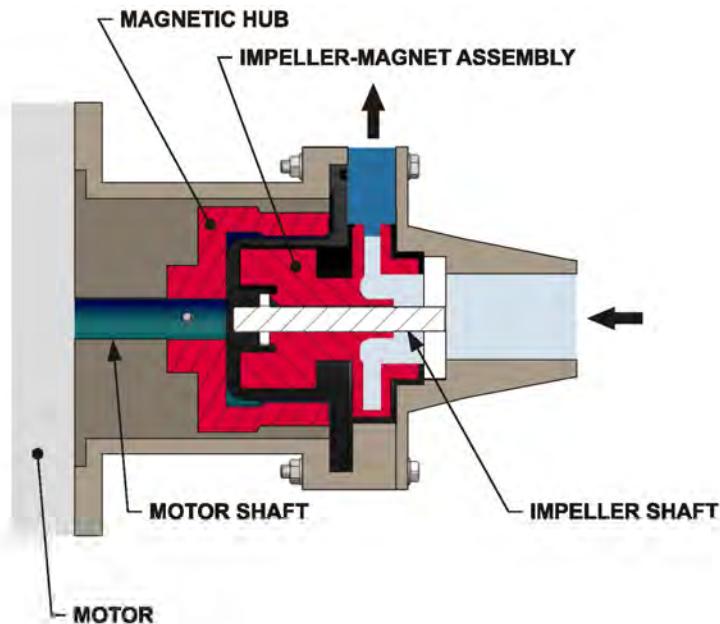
Magnetic-Drive Centrifugal Pump.
